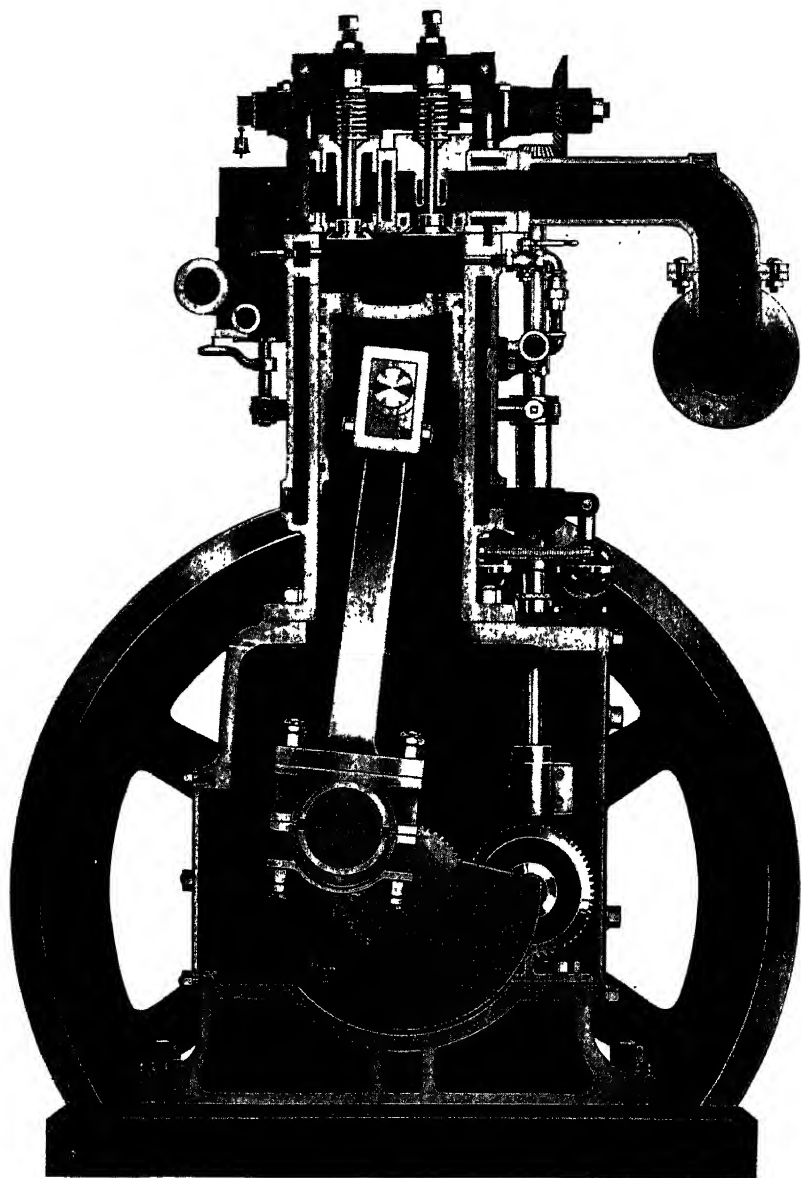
Bruce-Macbeth Four-Cylinder Engine. Section.
